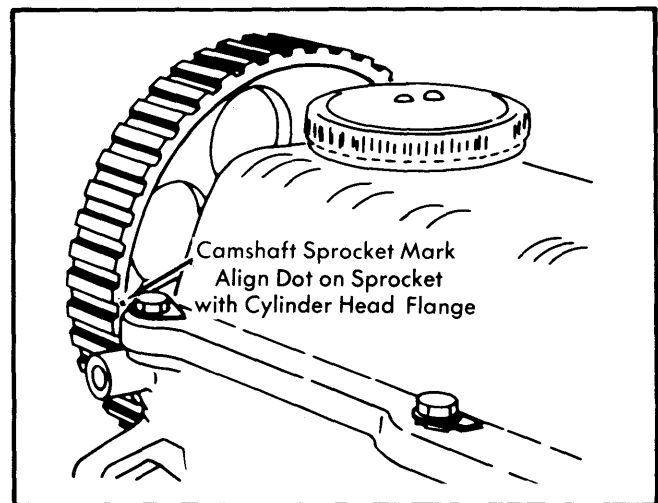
Index Mark on Camshaft Sprocket Aligned with Cylinder Head Flange
